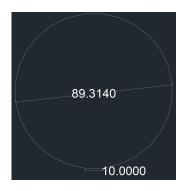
CAD Representation of 28 Sided Character Gear (mm)
